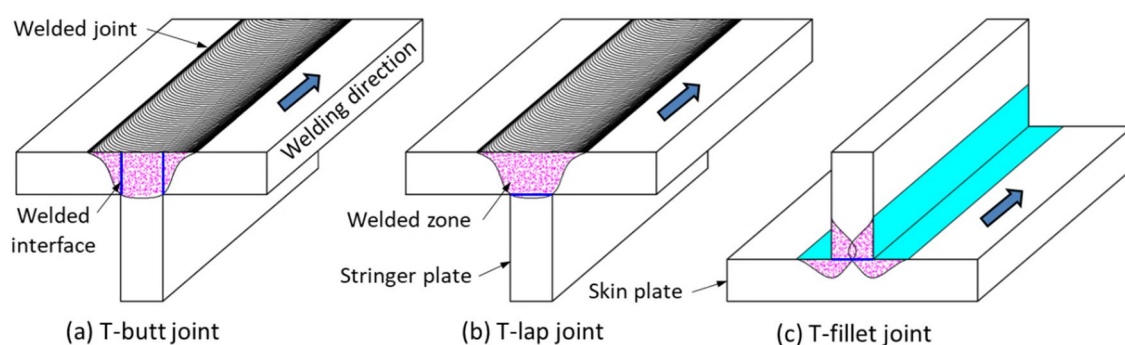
Common FSWed T-joint configurations: (a) T-butt joint, (b) T-lap joint, and (c) T-fillet joint.
